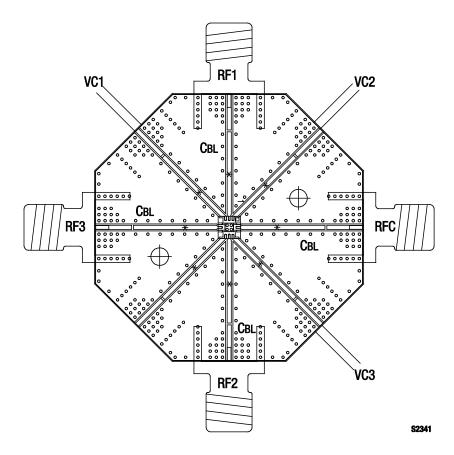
SKY13398-000 Evaluation Board Assembly Diagram
